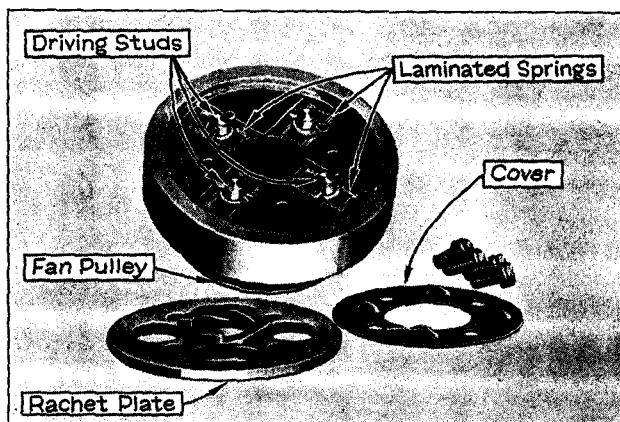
The harmonic balancer should be serviced as a complete unit.
